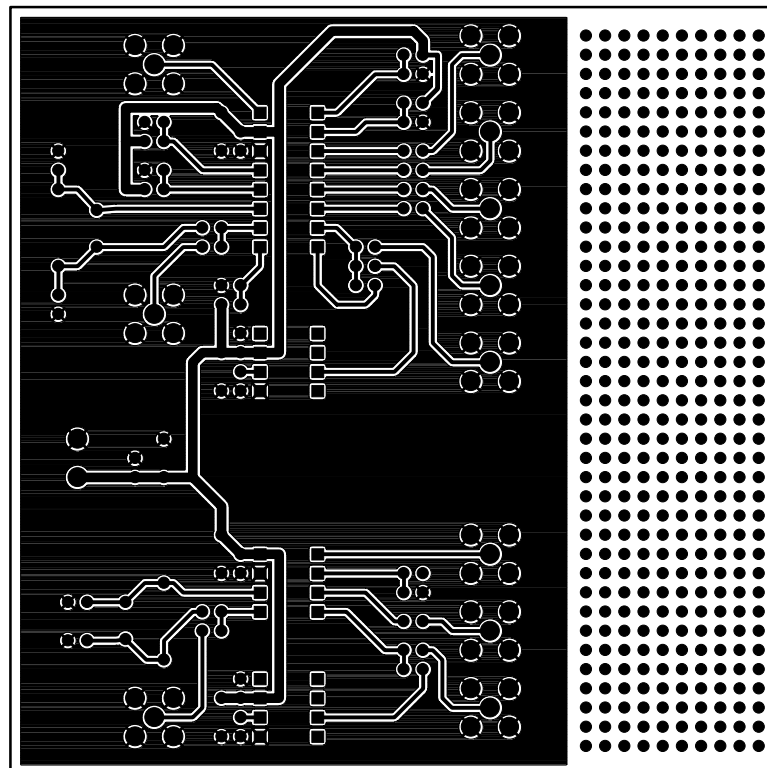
AD7741/42 Evaluation Board Solder Side Artwork
